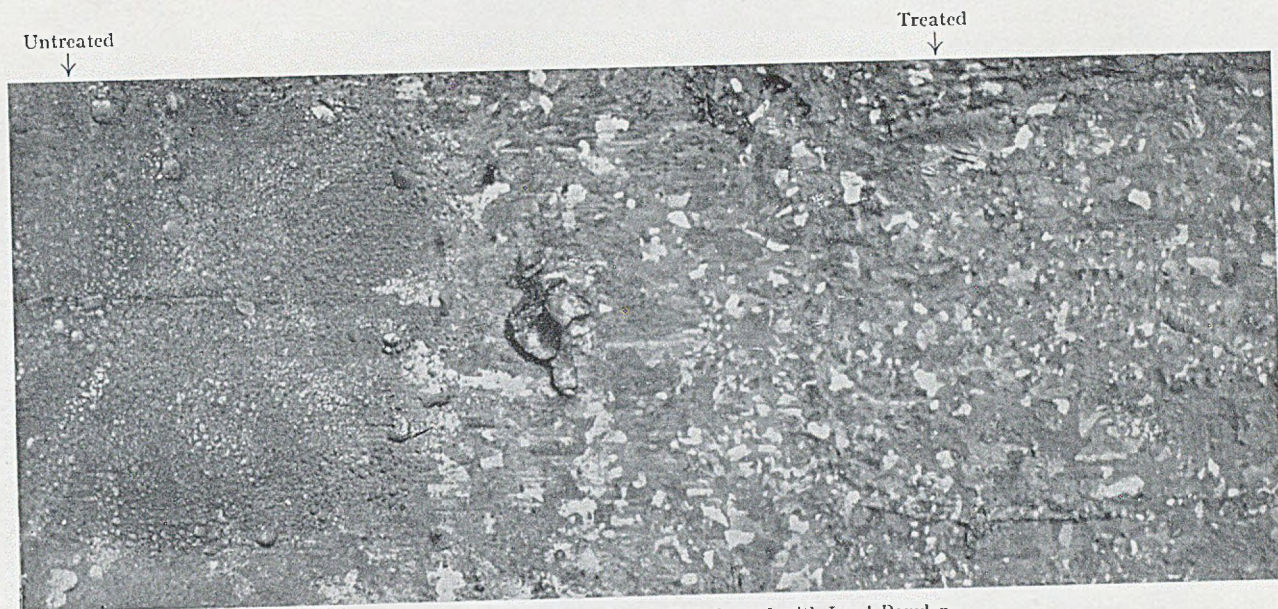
Lead Cast in Steel Mould Half Coated with Lead Powder.
